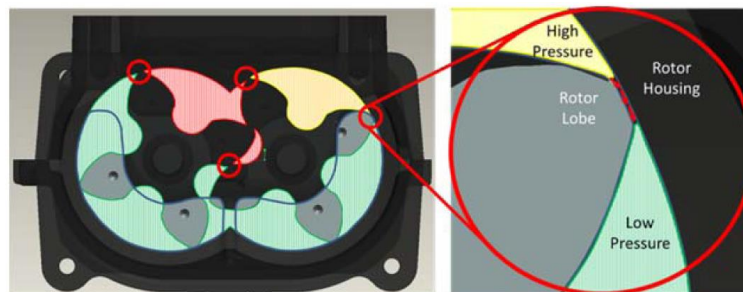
Diametral rotor leakage locations (left) and air leakage between the rotor lobe tip and rotor housing (right). [130]
